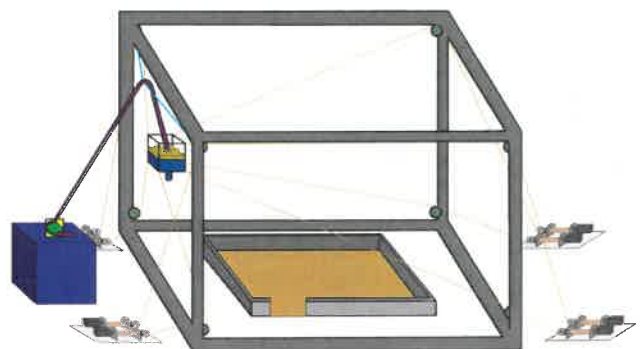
CONCEPT FOR LARGE-SCALE ADDITIVE MANUFACTURING [1]
